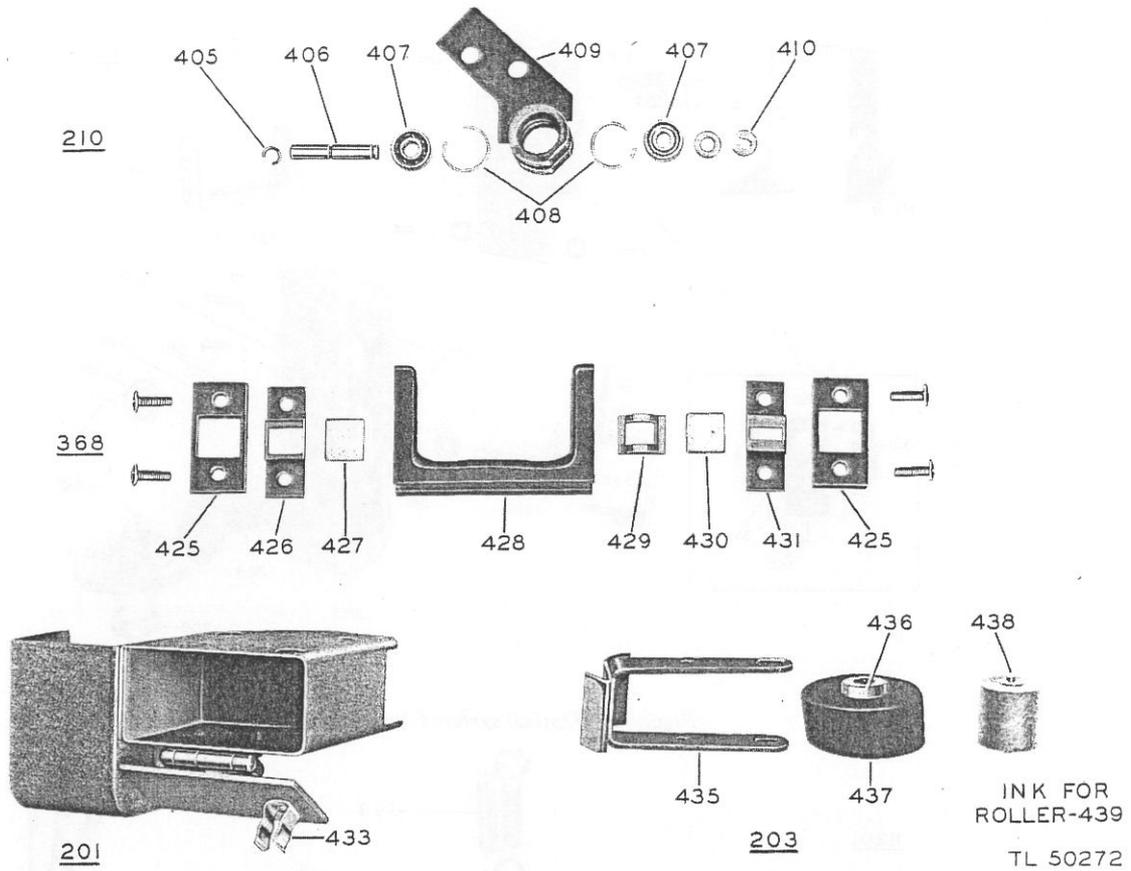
Idler assembly, bracket-and-lens assembly, inker housing, and inker assembly (disassembled)
